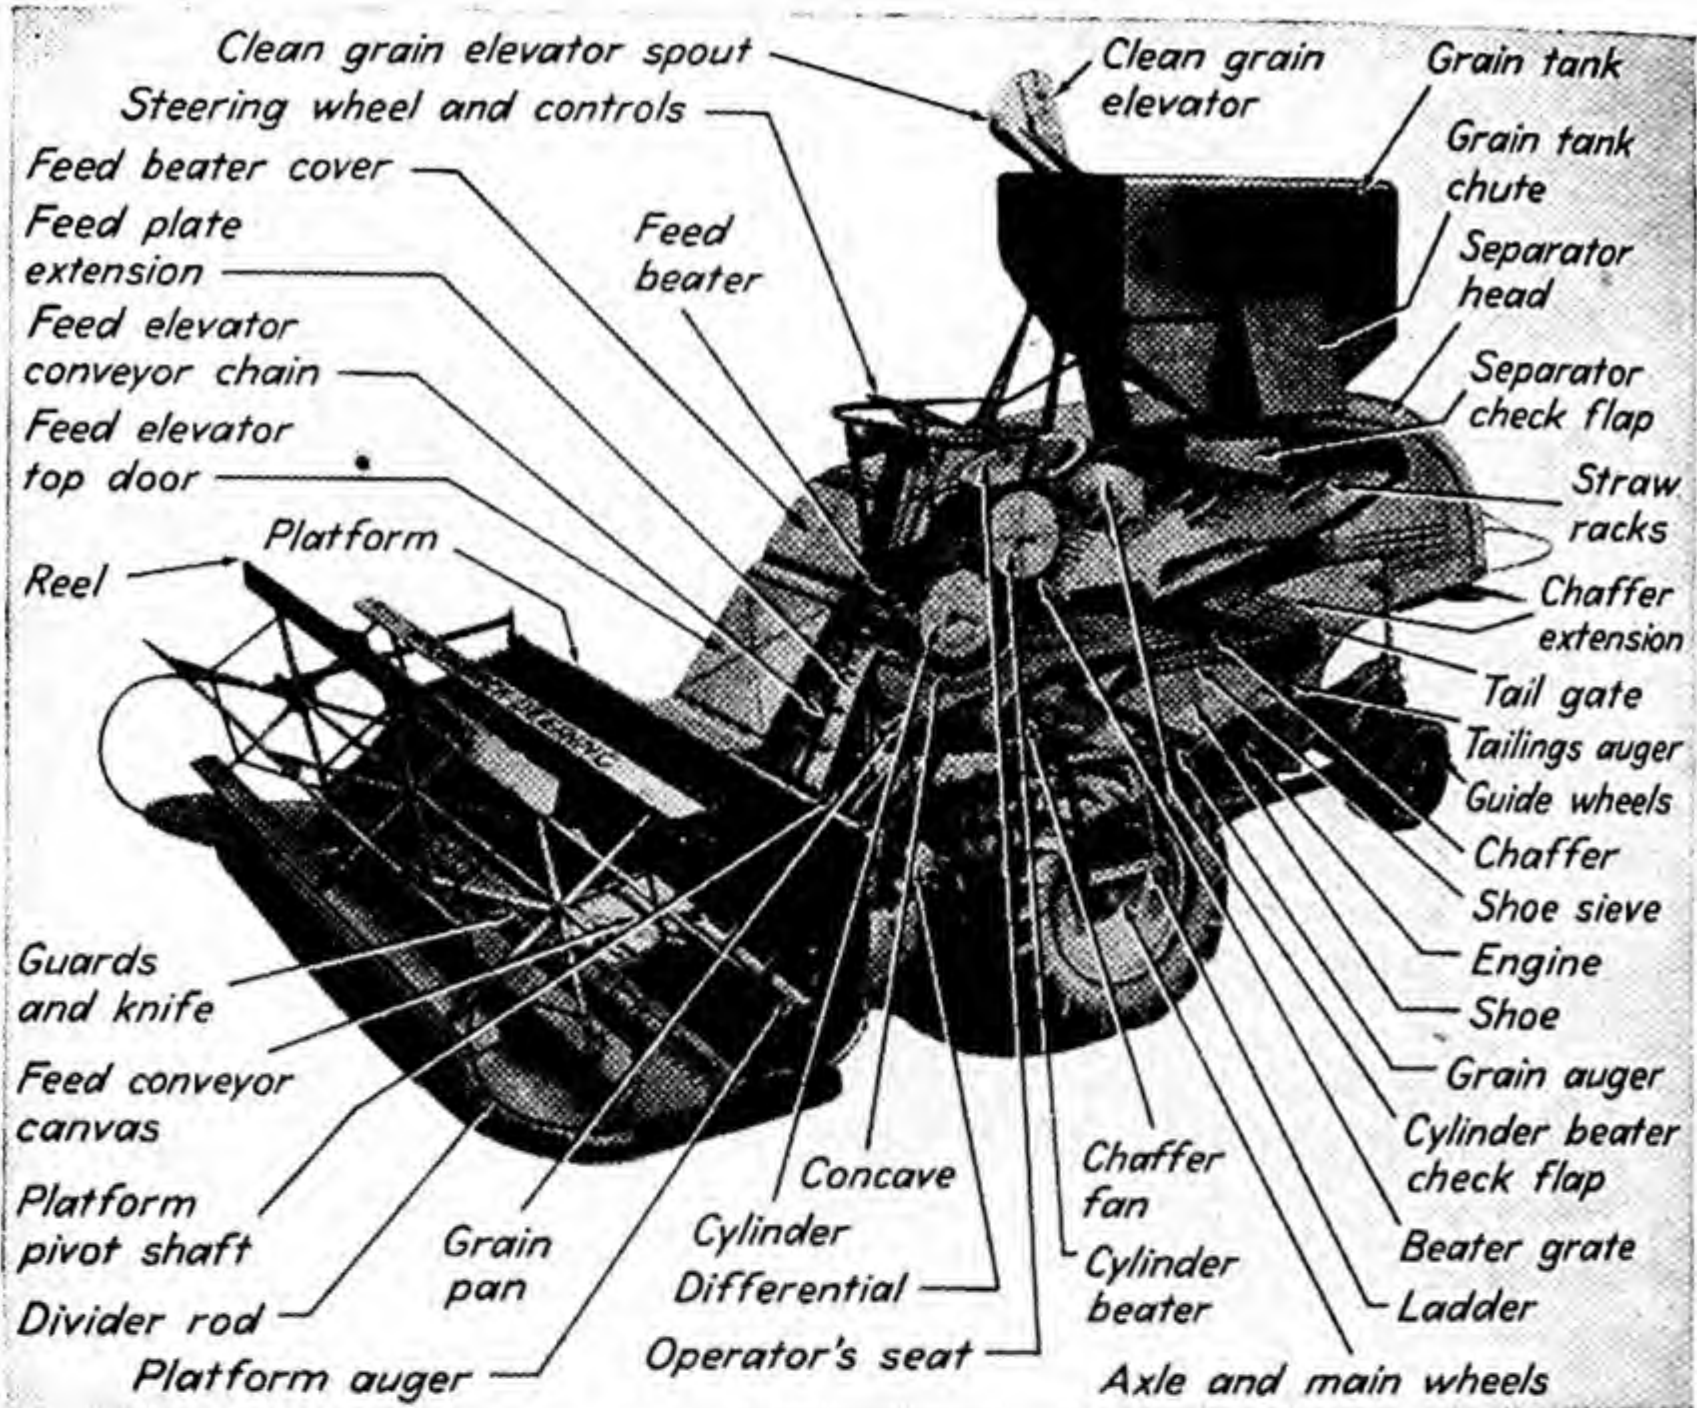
Cutaway view of self-propelled combine showing location of various parts. Engine has been removed to show interior parts.
